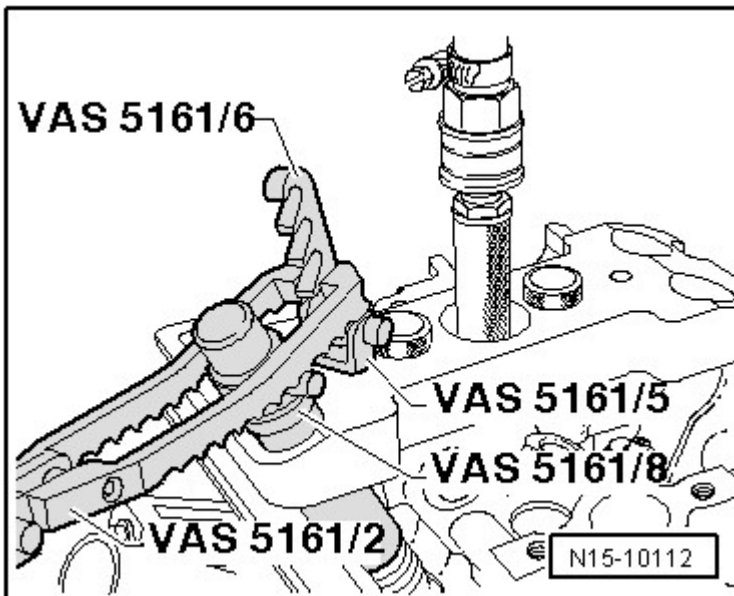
Identifying Engaging Device VAS 5161/6 With Installation Forks VAS 5161/5 Installed Into Guide Plate VAS 5161/19
